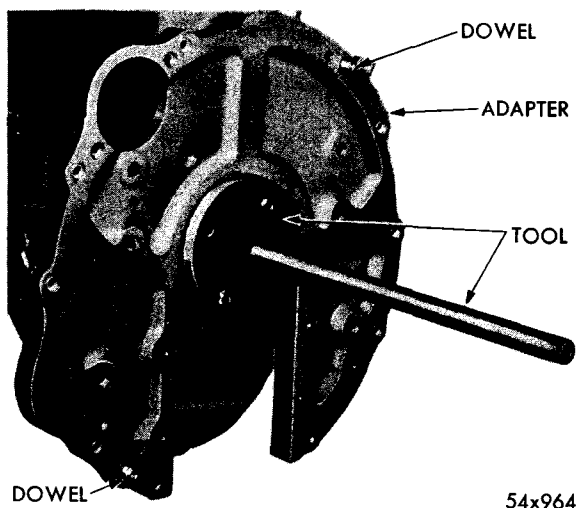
Fixture Tool C-870 Installed to Crankshaft Flange
